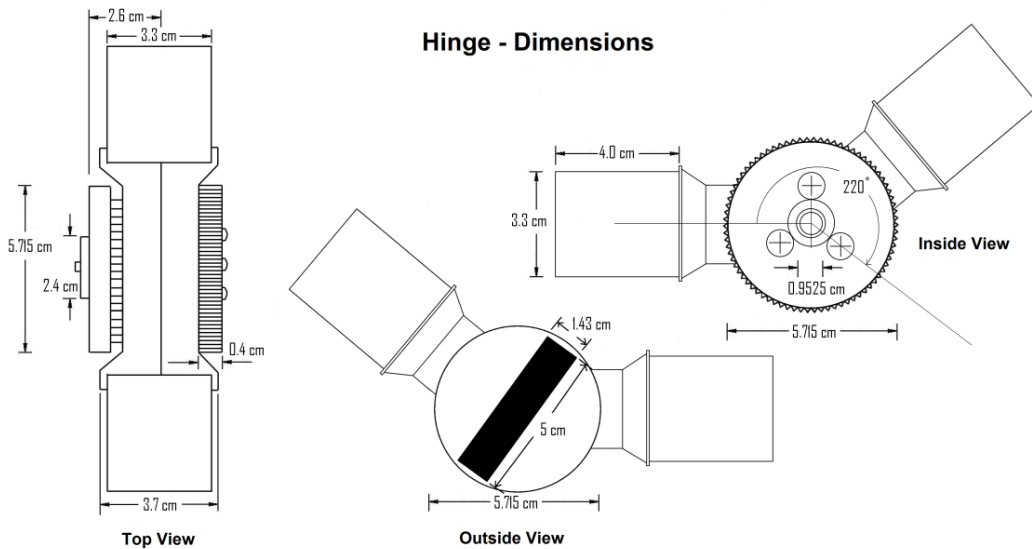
Top, inside & outside view of the hinge and their dimensions
